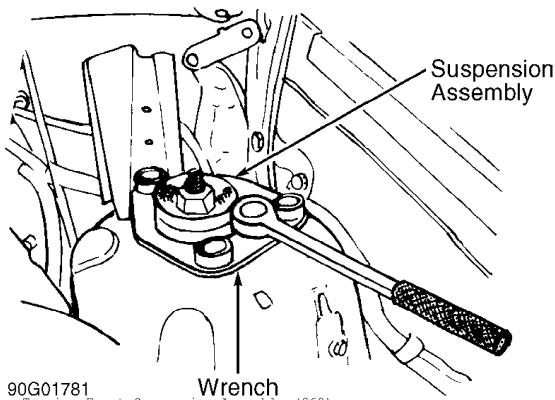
Turning Front Suspension Assembly (960) Courtesy of Volvo Cars of North America.
